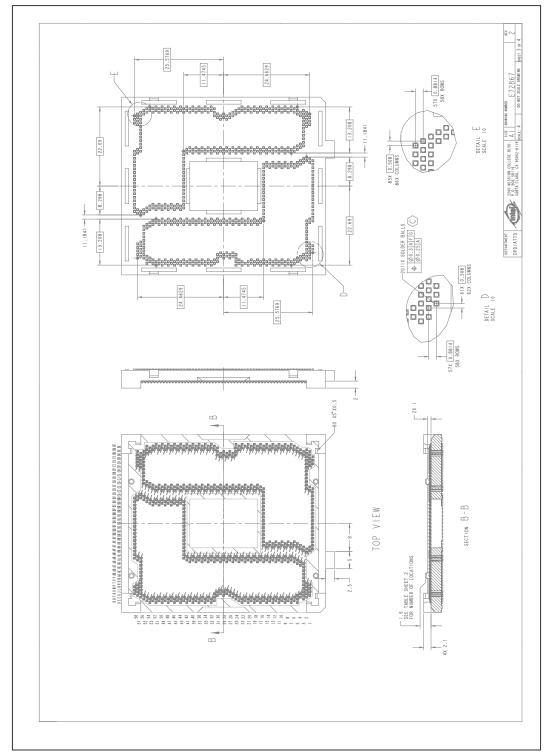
Socket Mechanical Drawing (Sheet 3 of 4)
